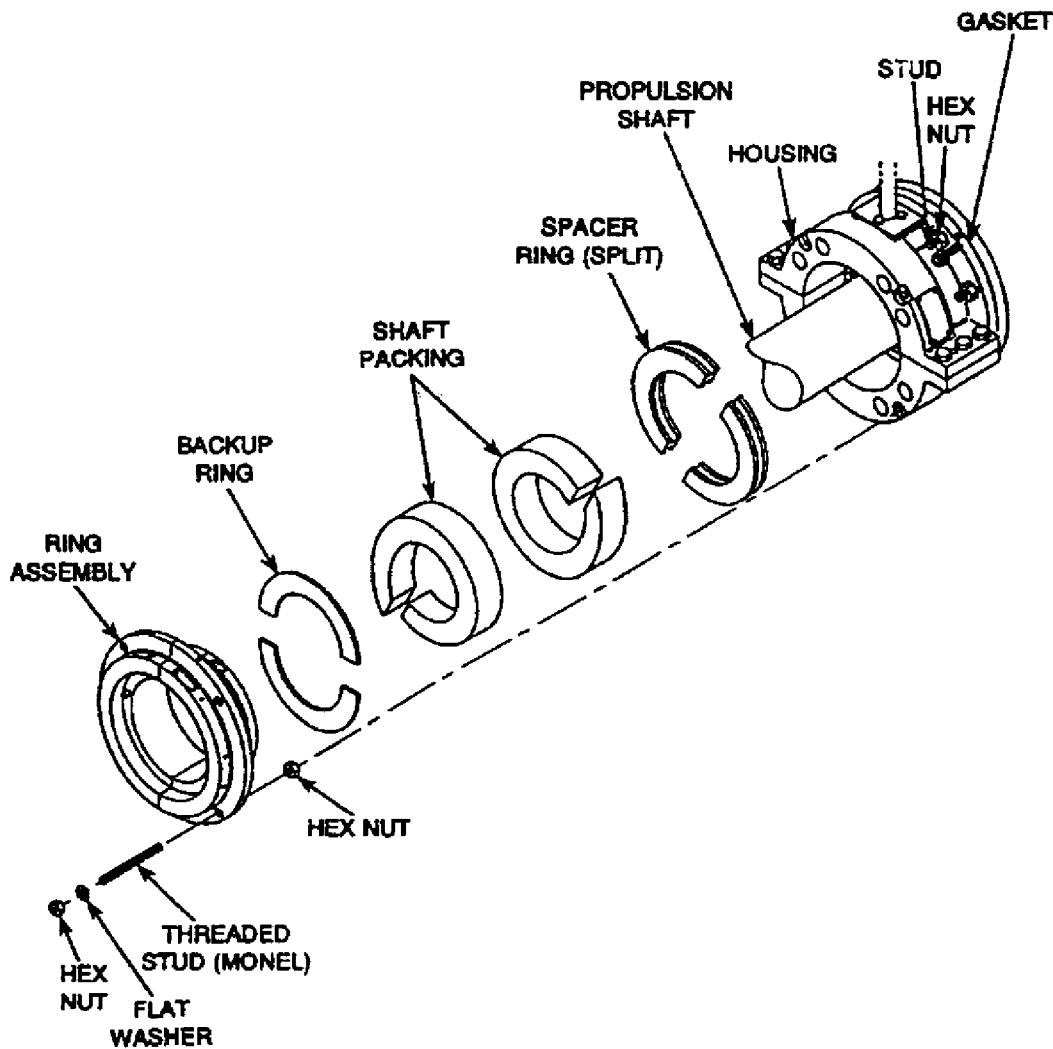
Sealol Repair Packings (Exploded View)
